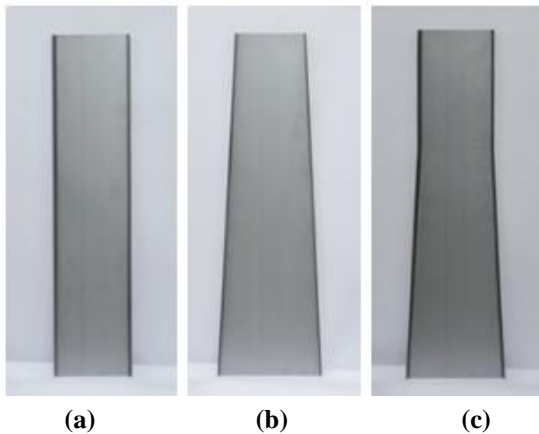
Fabricated flexible roll formed part; (a) shape A, (b) shape B, (c) shape C
